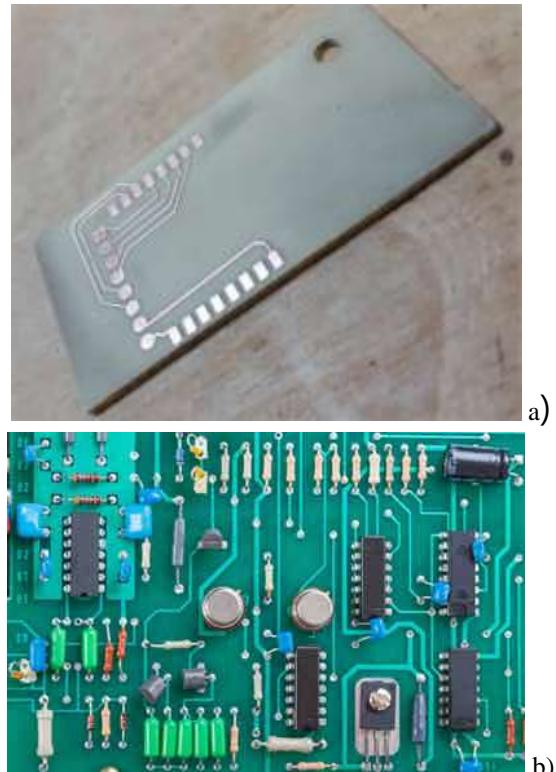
, Two examples in designing of printing circuit board (PCB): a) monolayer and b) multilayer design
